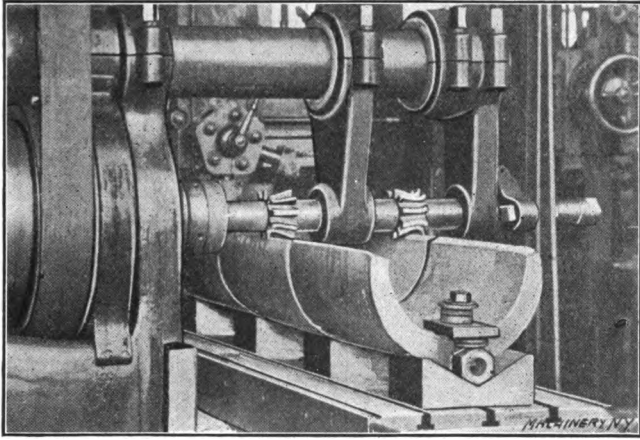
Milling the Edge of the Crown Brasses for the Fit in the Main Bearing Casting
